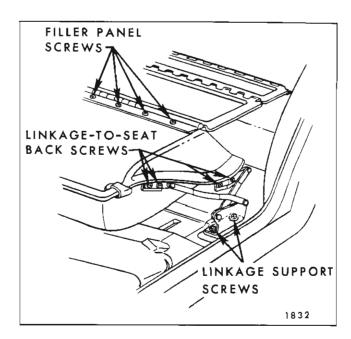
H20—Folding Second Seat Back Linkage and Filler Panel
